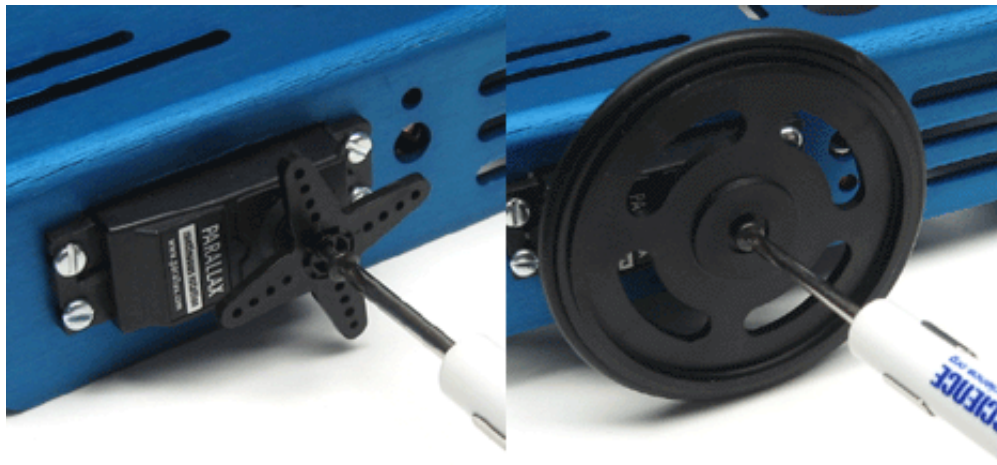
Removing the plastic star (left) and attaching the wheel (right).
